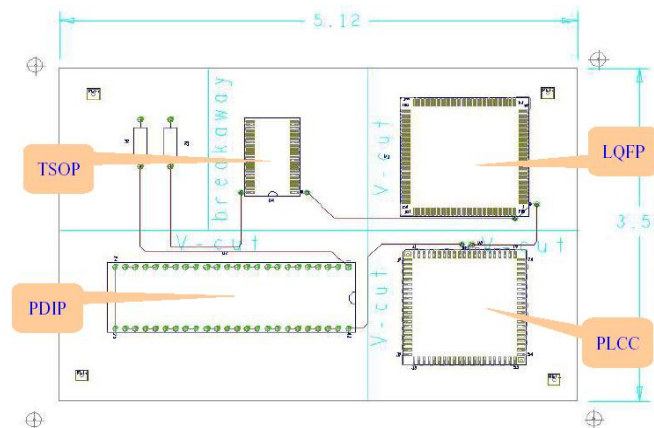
The outline of solder joint of lead frame package on board for whisker observation
